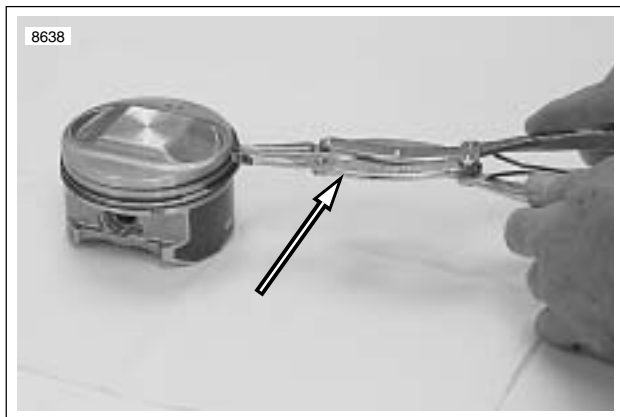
Installing Piston Rings Transmission Shaft Retaining Ring Pliers (Part No. J-5586)
